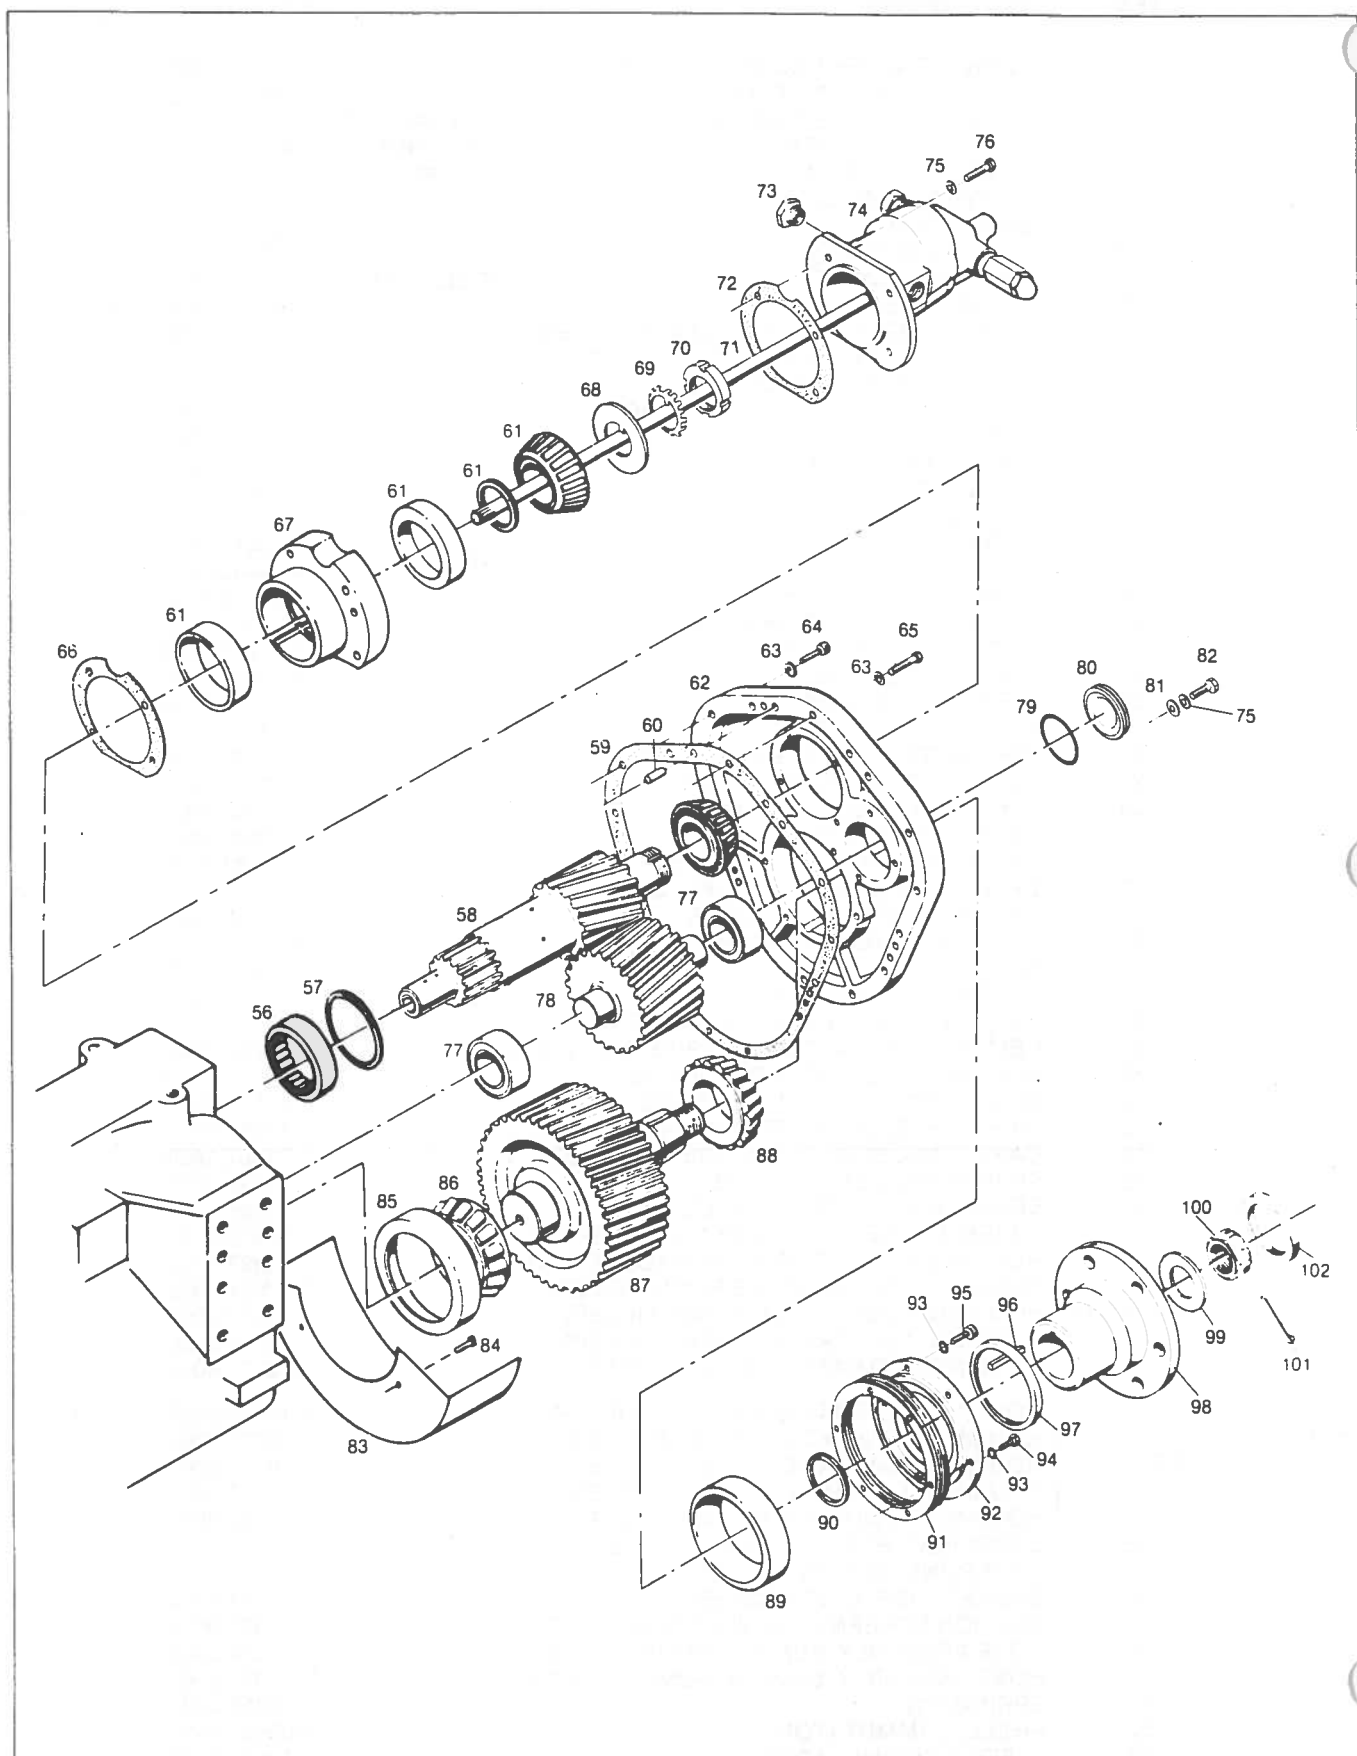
Transmission Assembly, Part B: Pinion Parts, Idler Parts, Cover and Output Parts
